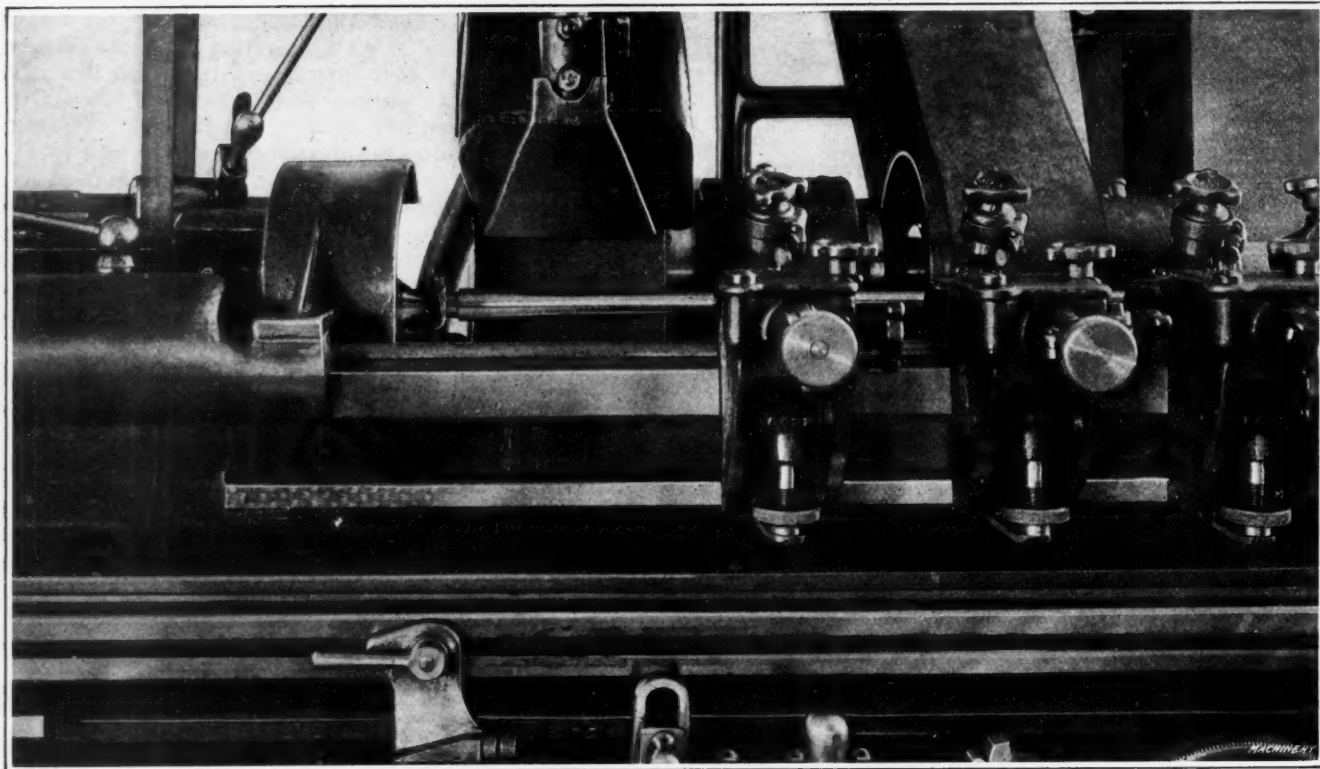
Set-up on a 10 by 36 Inch Norton Plain Grinding Machine for grinding Rifle Barrels in One Operation
